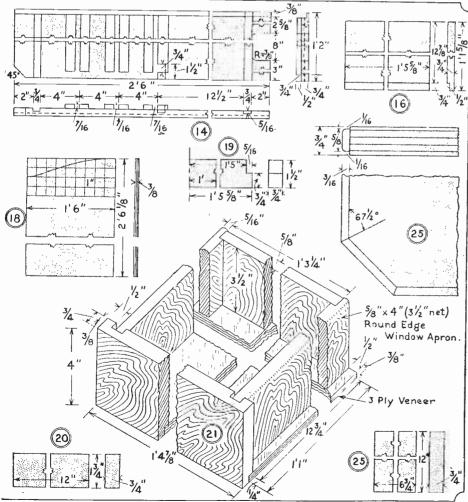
in the above drawing gives further dimensions of the cabinet size. Fig. 16 shows how the lower shelf is put in place. The back of the drawer is shown in Fig. 18, and the drawer rail in Fig. 19. Fig. 21 shows construction of drawers, and Fig. 25 shows how the molding is glued.
